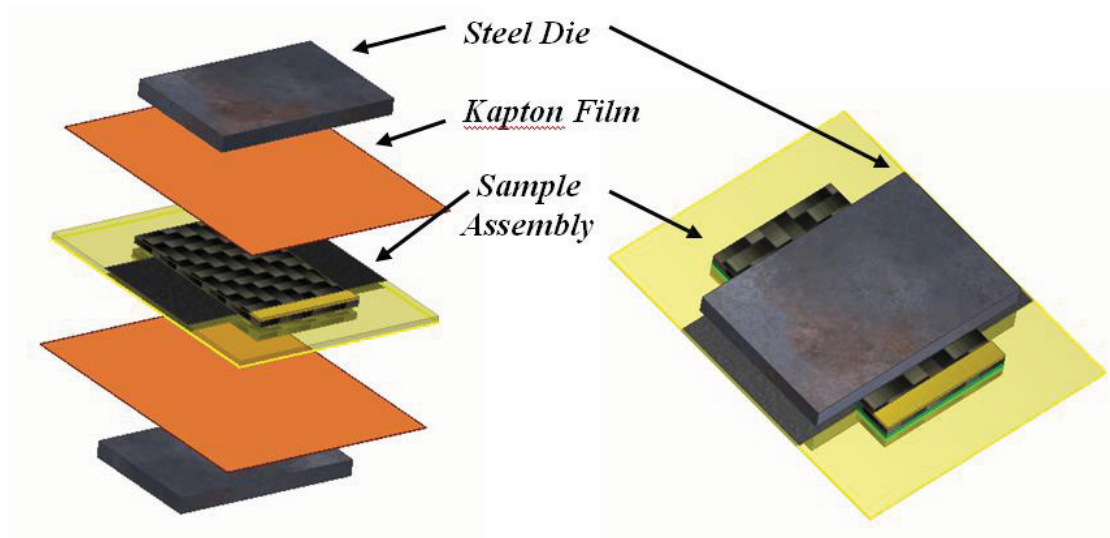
Exploded (left) and isometric (right) views of assembly press for adhesion samples. Kapton film not shown in isometric view for purpose of visualization.
